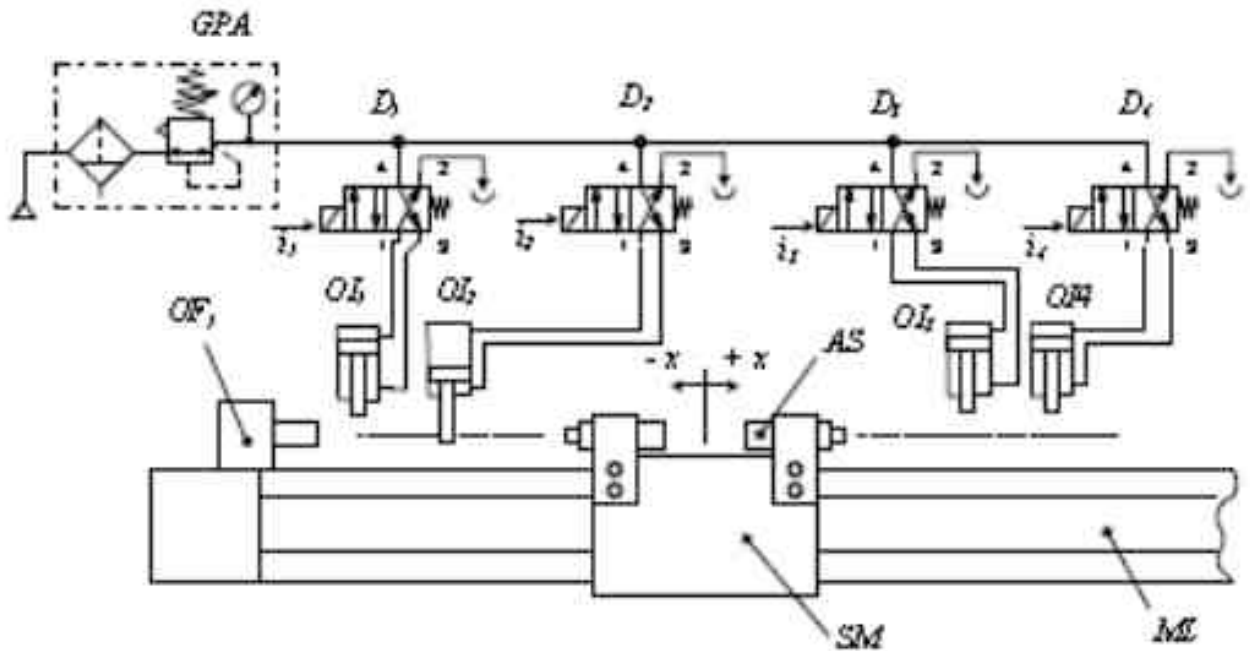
Pneumatic unit using a classic linear pneumatic motor
